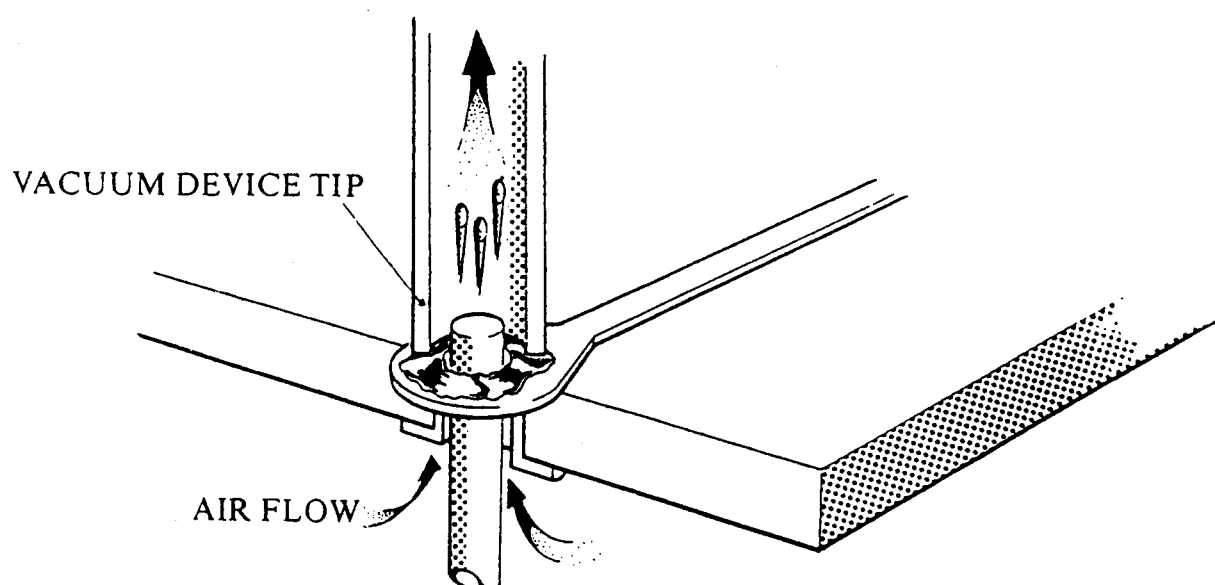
Continuous vacuum solder extraction on stud lead
